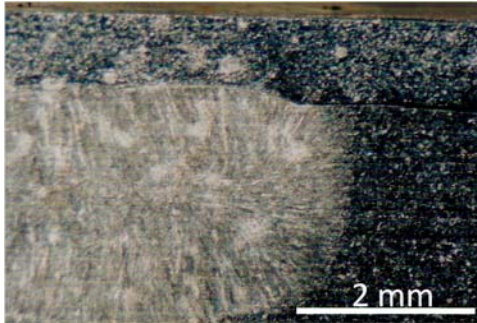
Macrostructure of spot welded unequal sheet thickness
